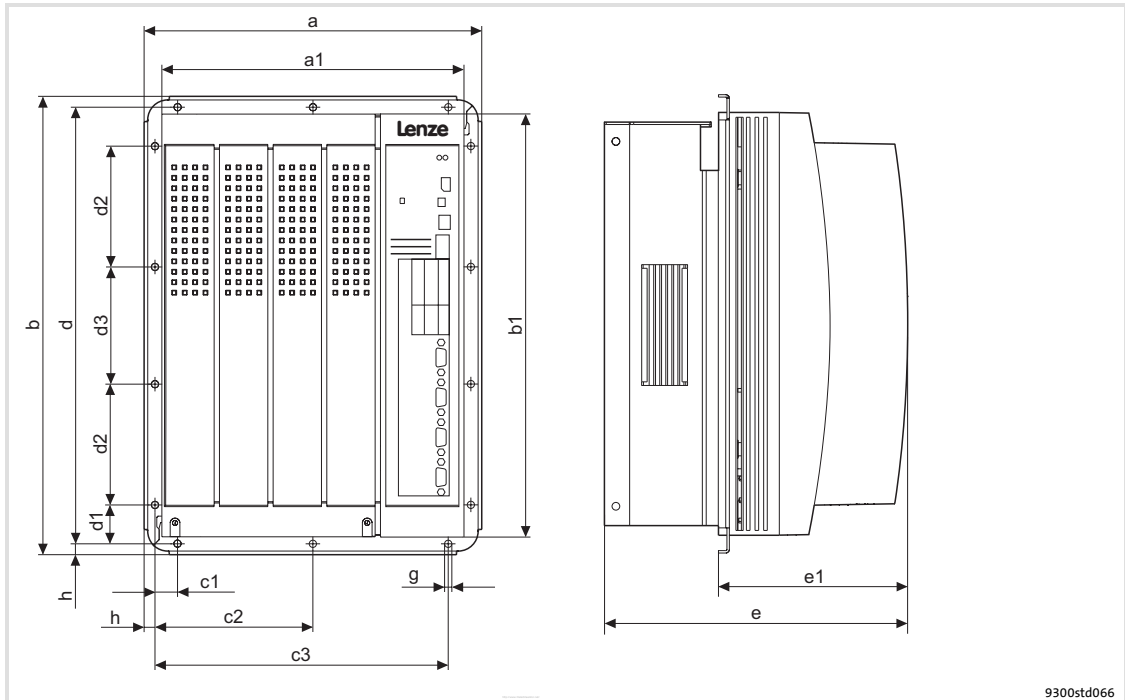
Dimensions for thermally separated mounting 15 ... 30 kW
